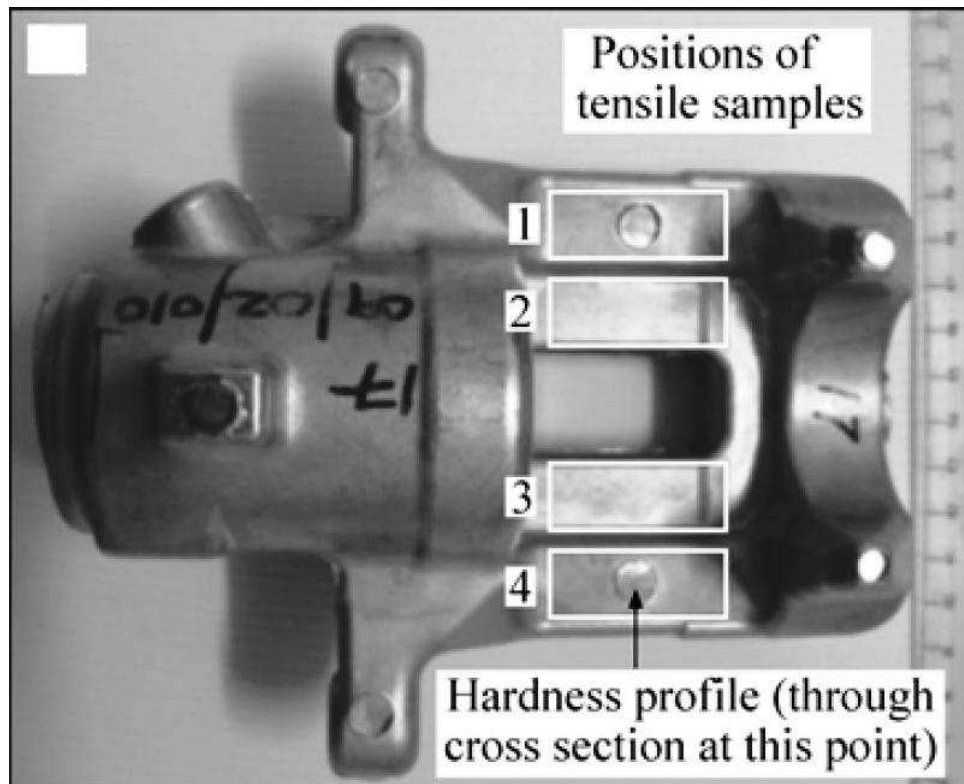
Positions where 4 tensile specimens/brake calliper were machined from.
